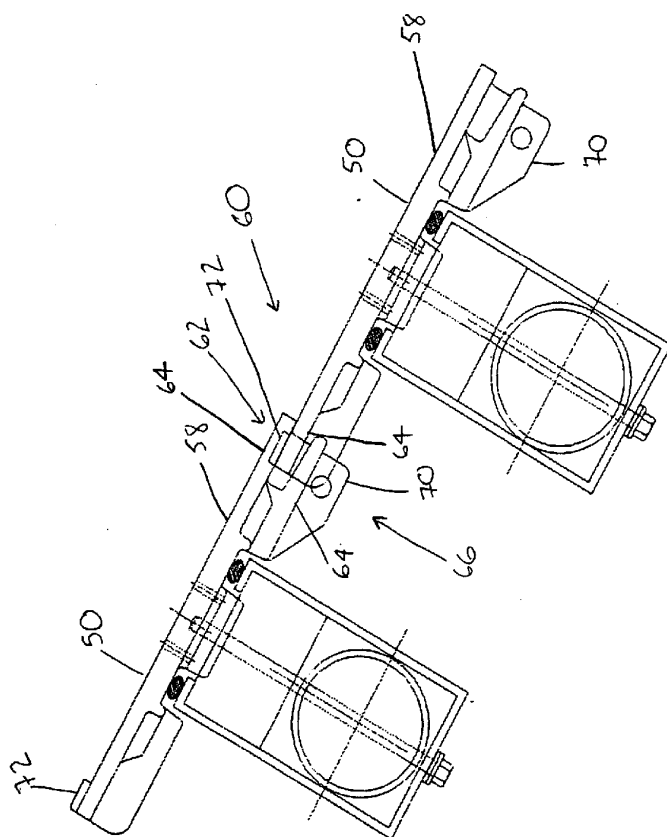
TYPICAL GRATE ASSEMBLY CROSS SECTION
